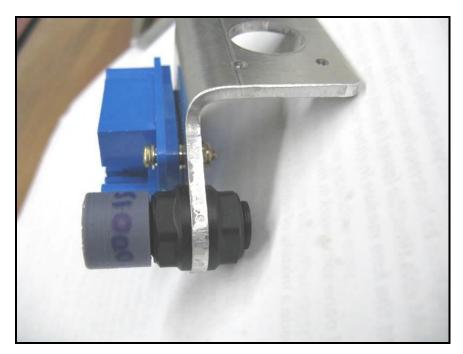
ES-00077 Electrical Connector, FLF-00012 Fitting and FLF-00015 Guide installed on F-00034A Bracket. Note: "Fixed" nut end faces inboard, as shown on the right.
